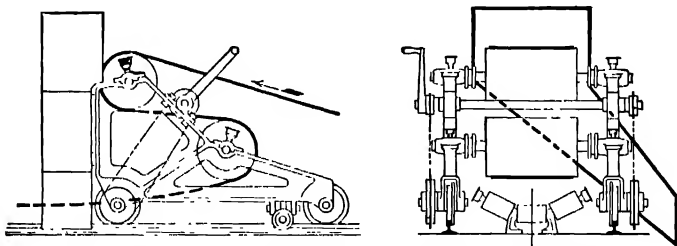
Hand-propelled Tripper for Belt Conveyor.
